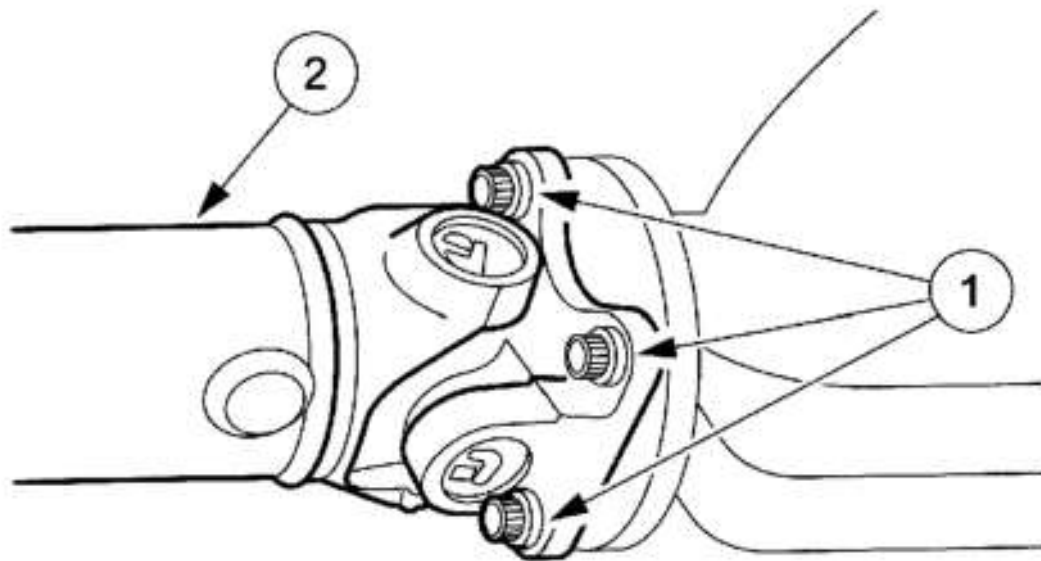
Marking Driveshaft Flange & Rear Axle Pinion Flange
